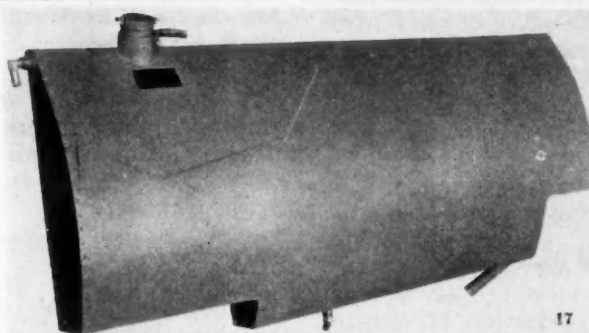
and 18 indicate the extremely large movement furnished the stabilizer by a screw located on the center line of the fuselage. The rubber discs in the tail-skid for taxiing and its long oleo-stroke are also shown. Riveted duralumin fuel and welded aluminum oil tanks, shown in Fig. 17, are used, these being mounted in the side fairing of the fuselage.
